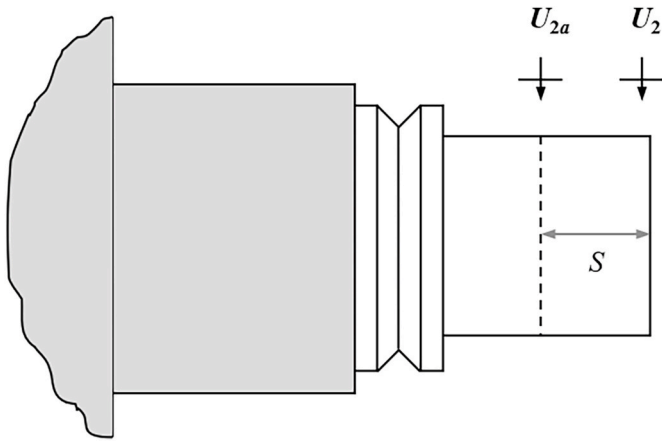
Direct and cross artifact-spindle-machine assembly measurement locations used to determine assembly rotation-to-force receptance N_{22} [92].
